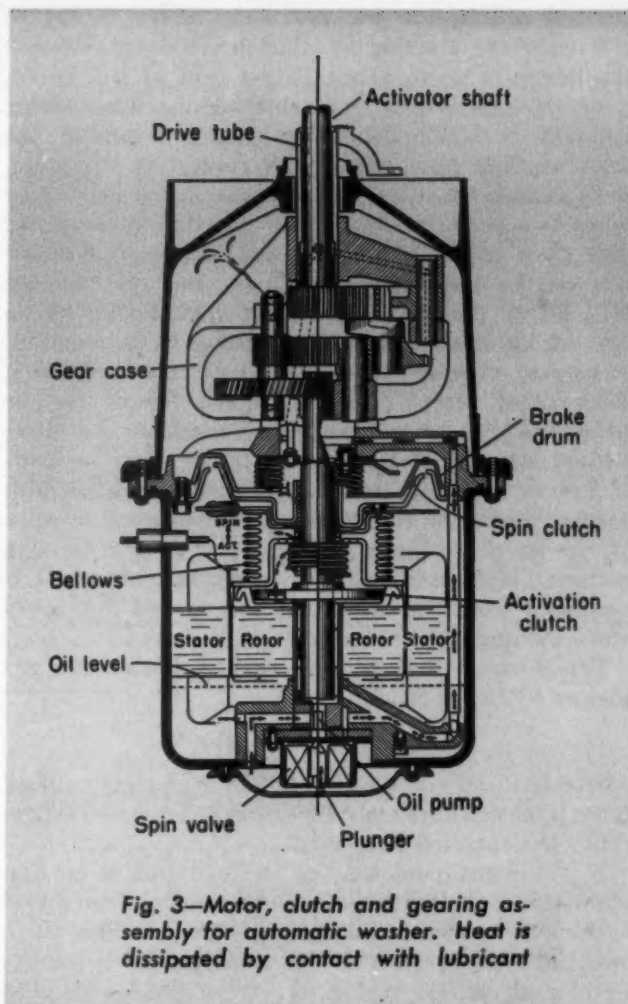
Motor, clutch and gearing assembly for automatic washer. Heat is dissipated by contact with lubricant
